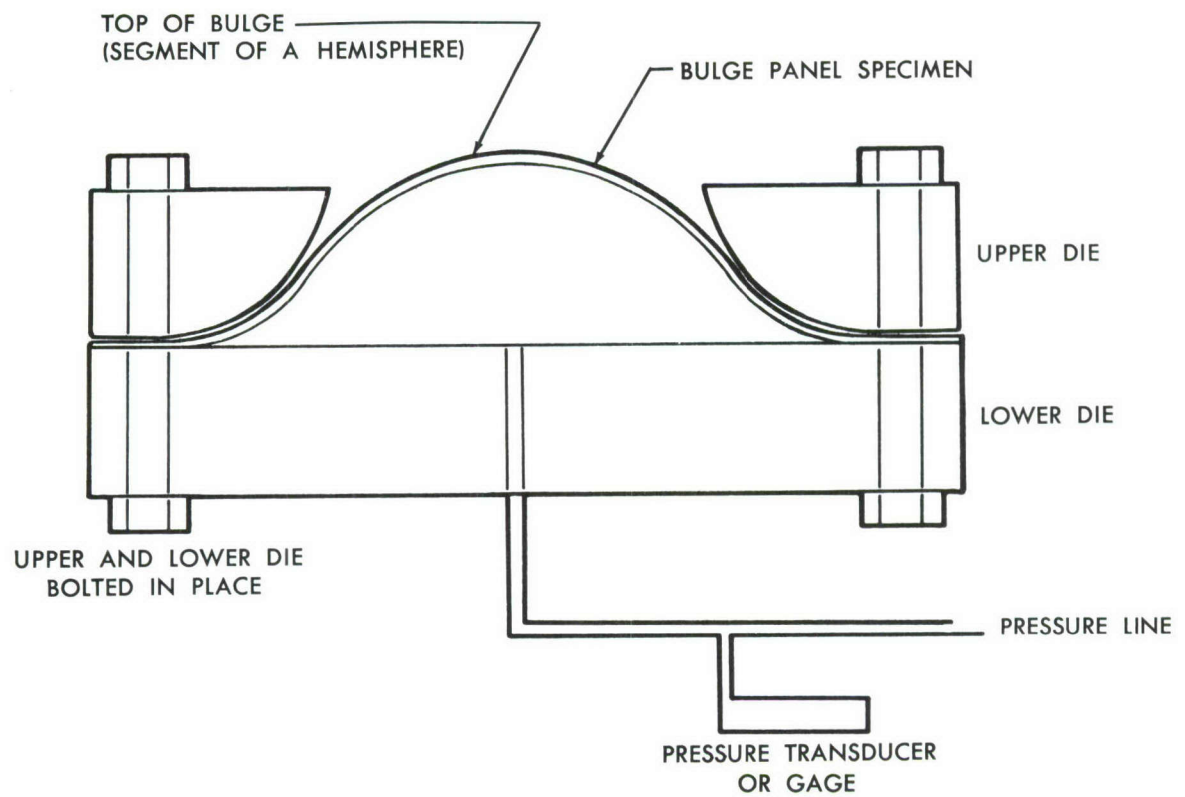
CROSS-SECTION OF BULGE SPECIMEN TEST APPARATUS
